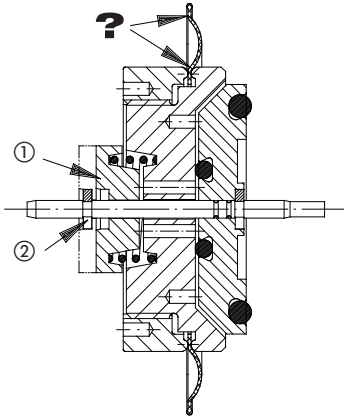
Diaphragm with ① thrust pin and ② retaining ring
